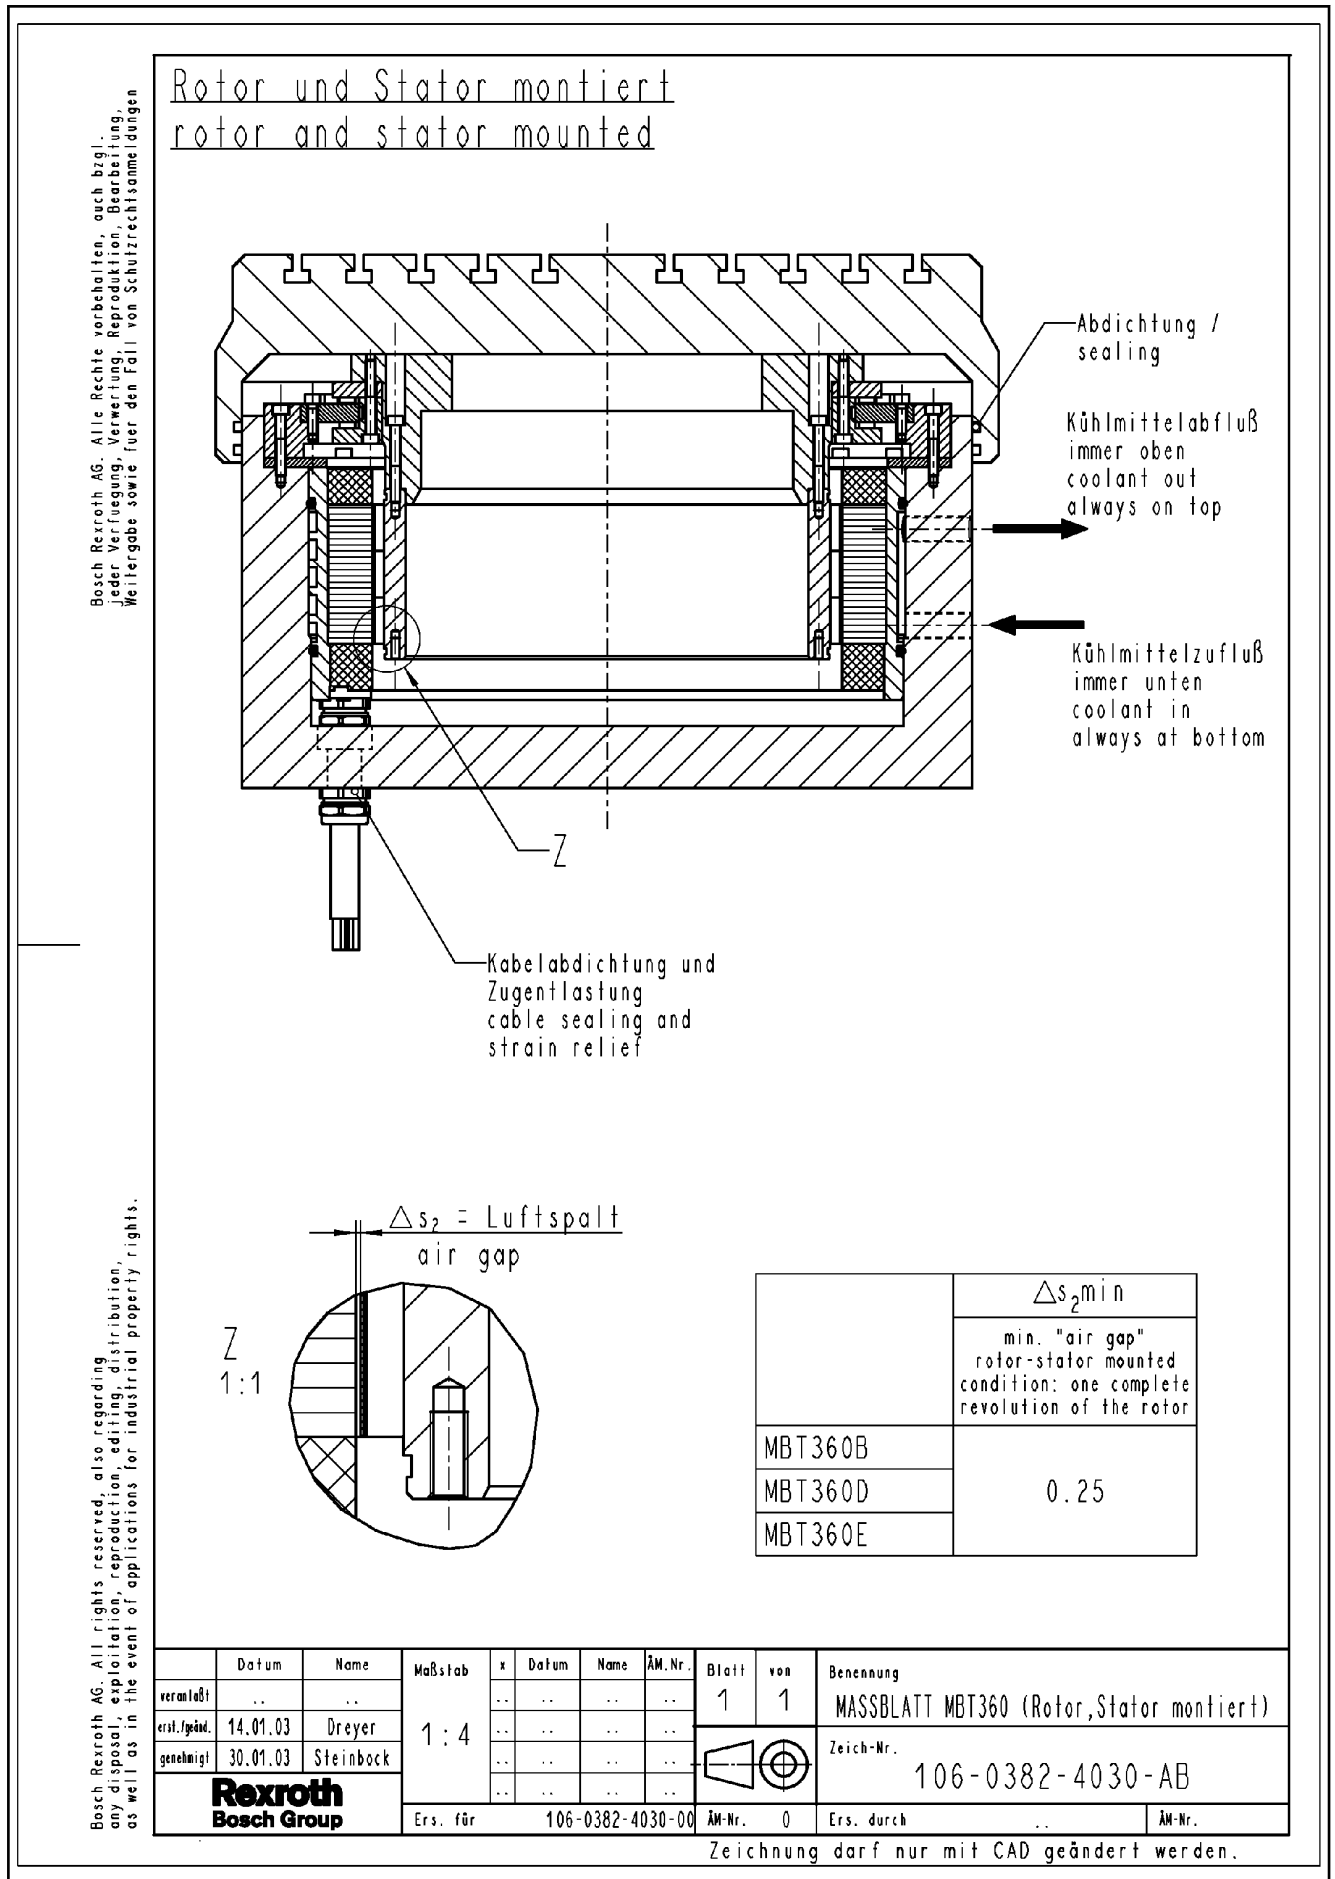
Dimension sheet for frame size 360, rotor and stator, mounted
